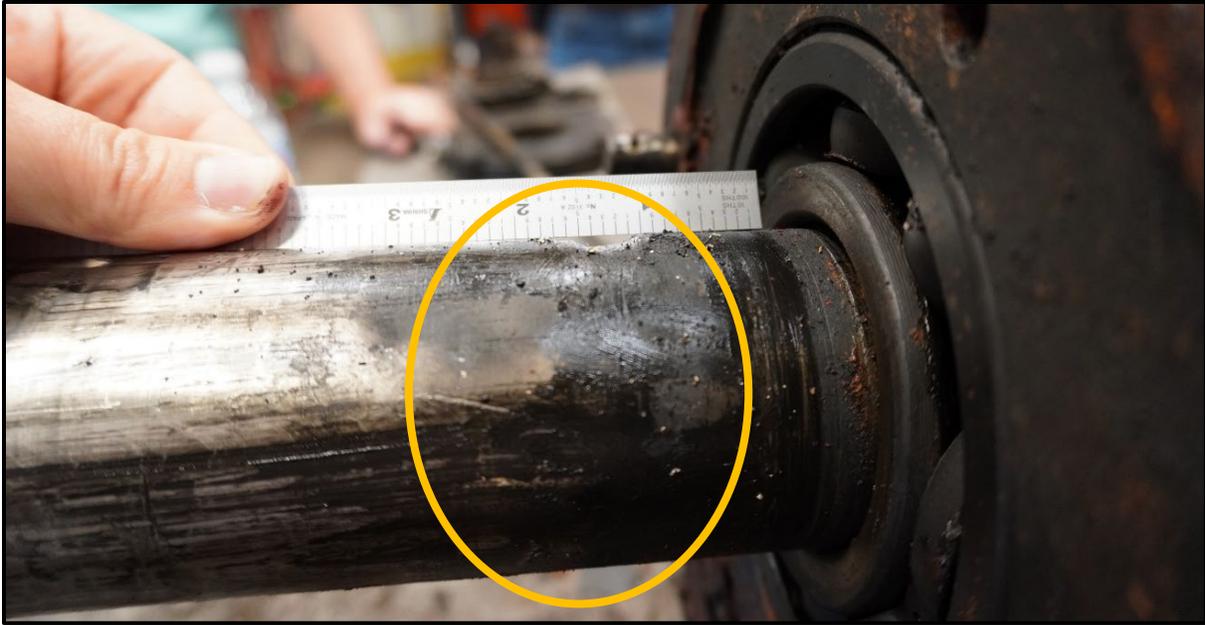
The severe abrasive wear damage observed on the Tank 80-8 pump shaft adjacent to inboard side of bearing housing, on August 30, 2019. (Credit: CSB)
